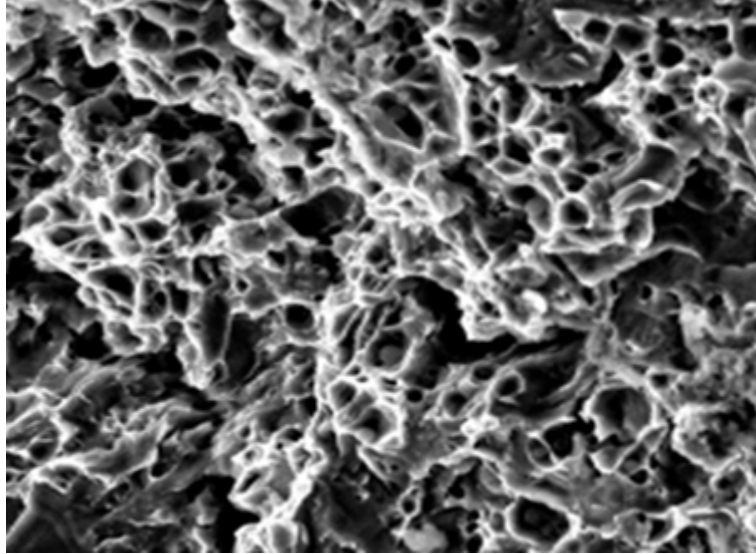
SEM measurement at x1000 magnification for specimen after breakage of tensile test which weld from by using welding flux (iii)
